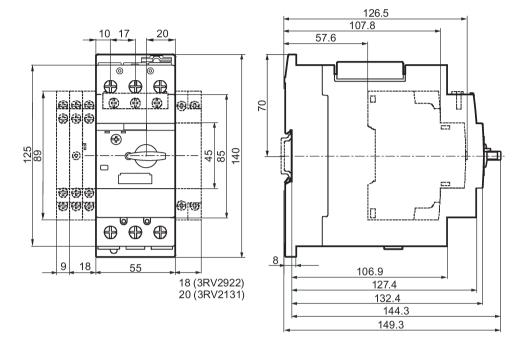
3RV2.31 motor starter protector (≤ 45 A)
